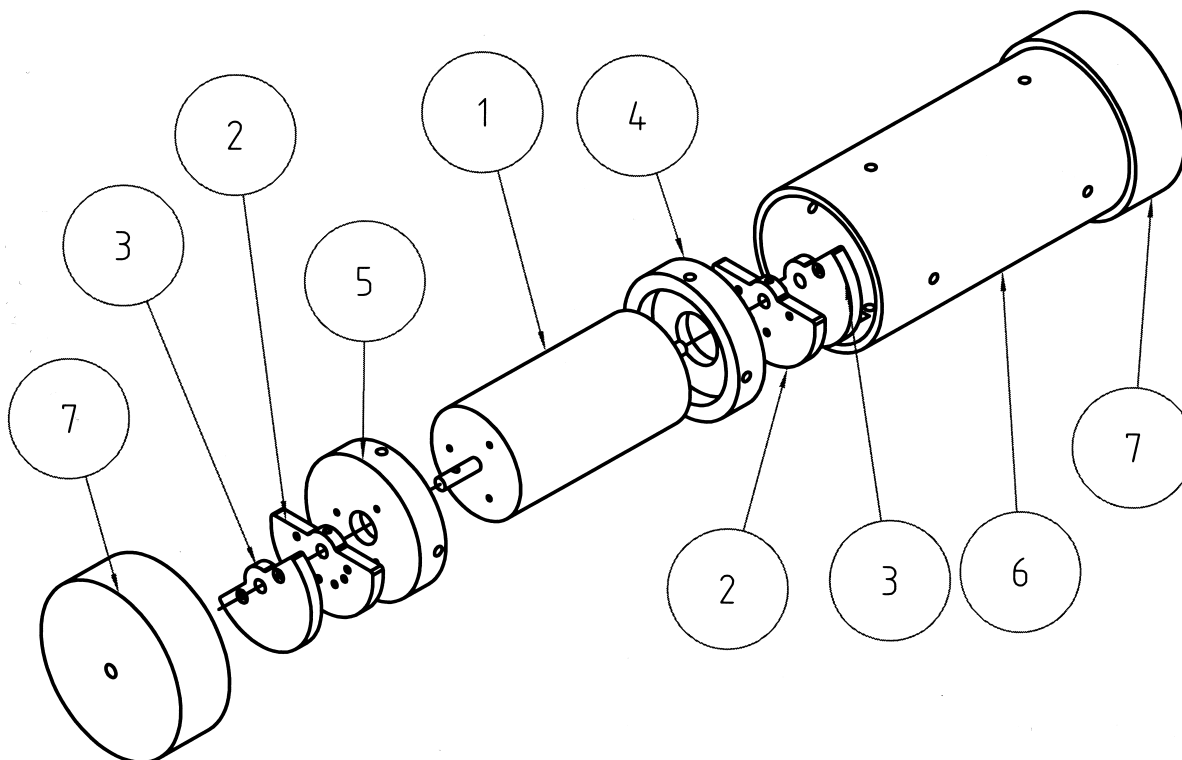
Components of the vibrator (1=motor; 2 and 3=eccentric mass; 4 and 5=ring for fixation of housing to motor; 6=housing for motor; 7=cap for housing)
